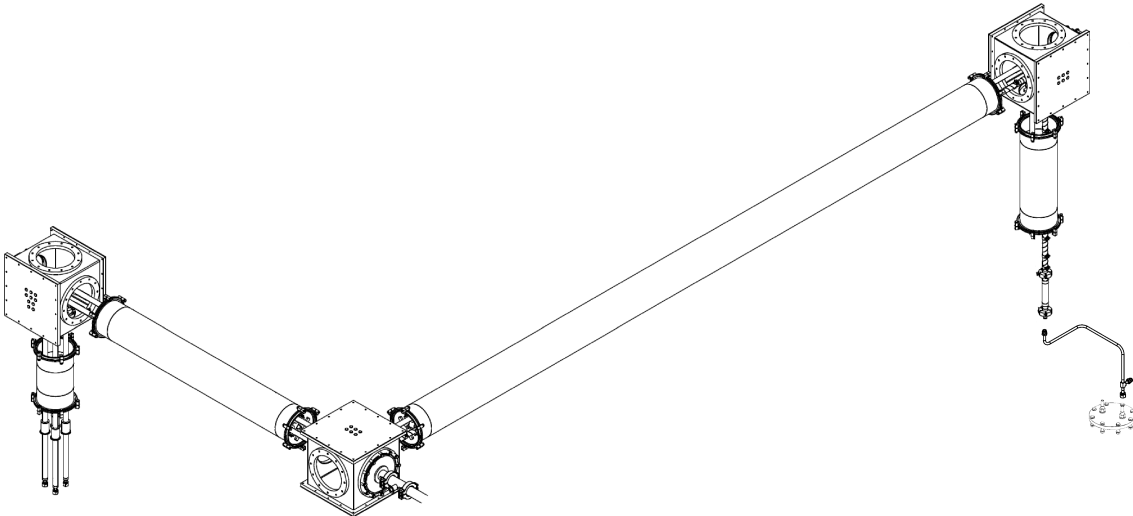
Technical drawing of the tritium injection line between ISS glove box and WGTS cryostat.
